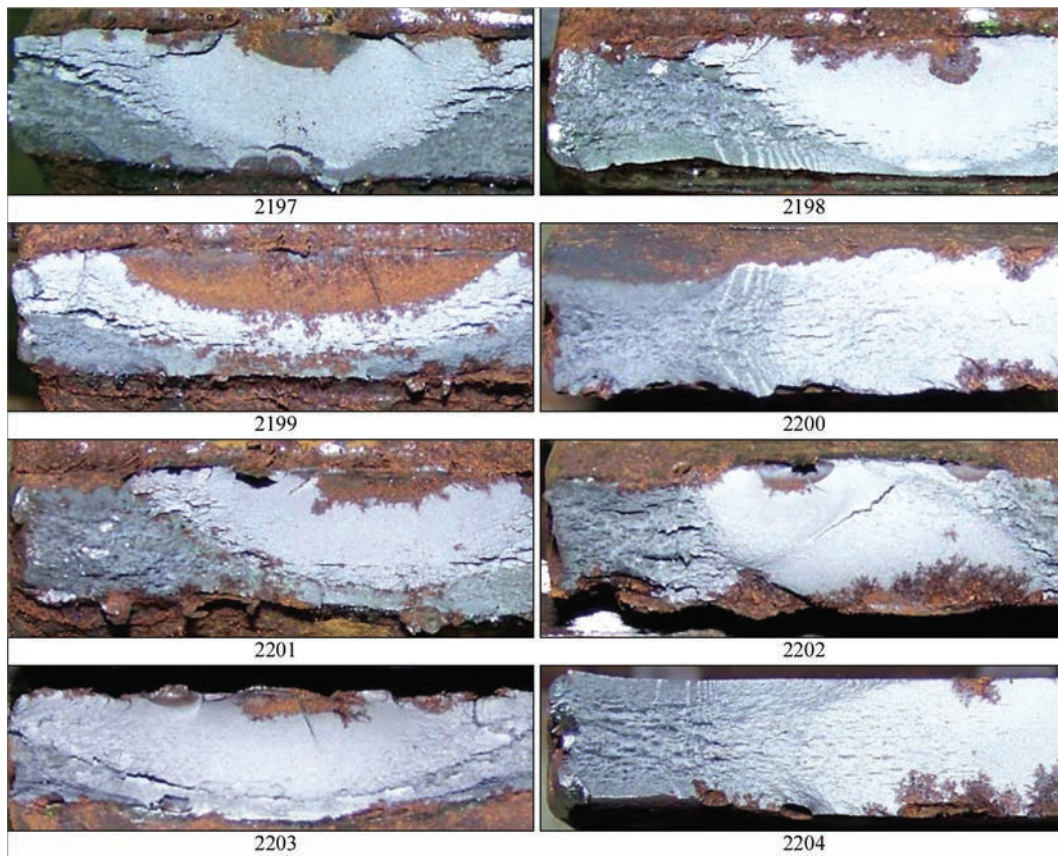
Fatigue fractures of specimens of T-welded joints of 15KhSND steel with surface fatigue cracks, which were strengthened by HFMP after soaking for 1200 h in KST-1 chamber (see Table 2)
